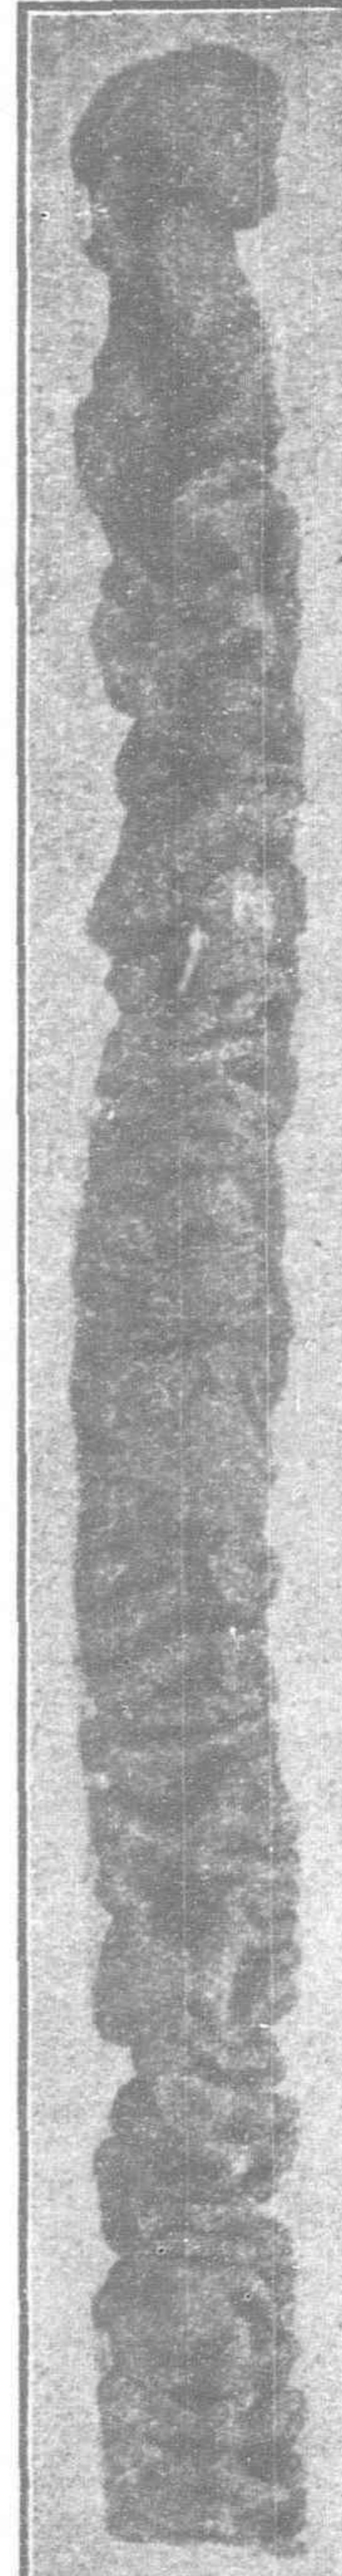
A PIPE THAT CRUMPLED, BUT WOULD NOT BREAK, WHEN FORTY GALLONS OF NITROGLYCERIN EXPLODED
